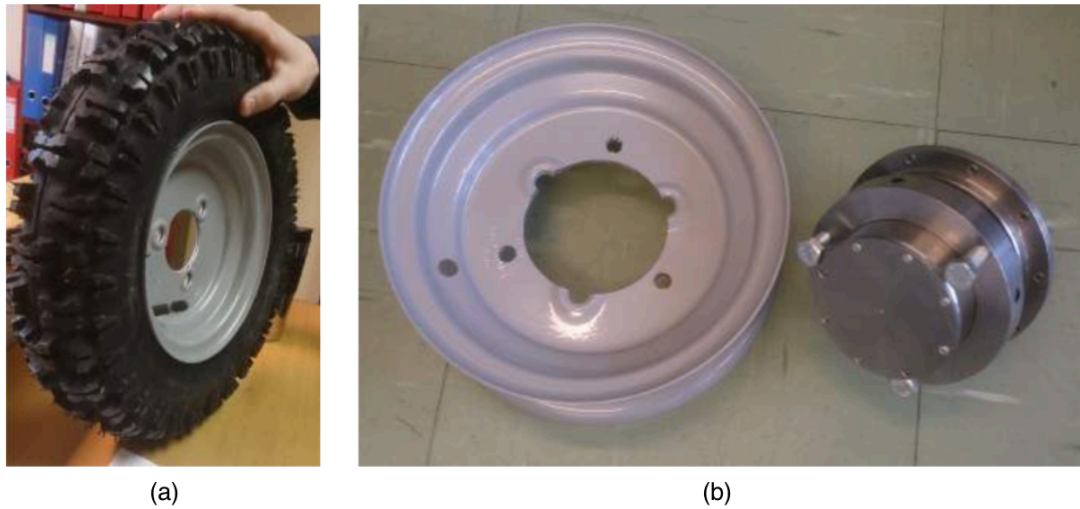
(a) Original wheel, (b) Modified wheel and gearbox
